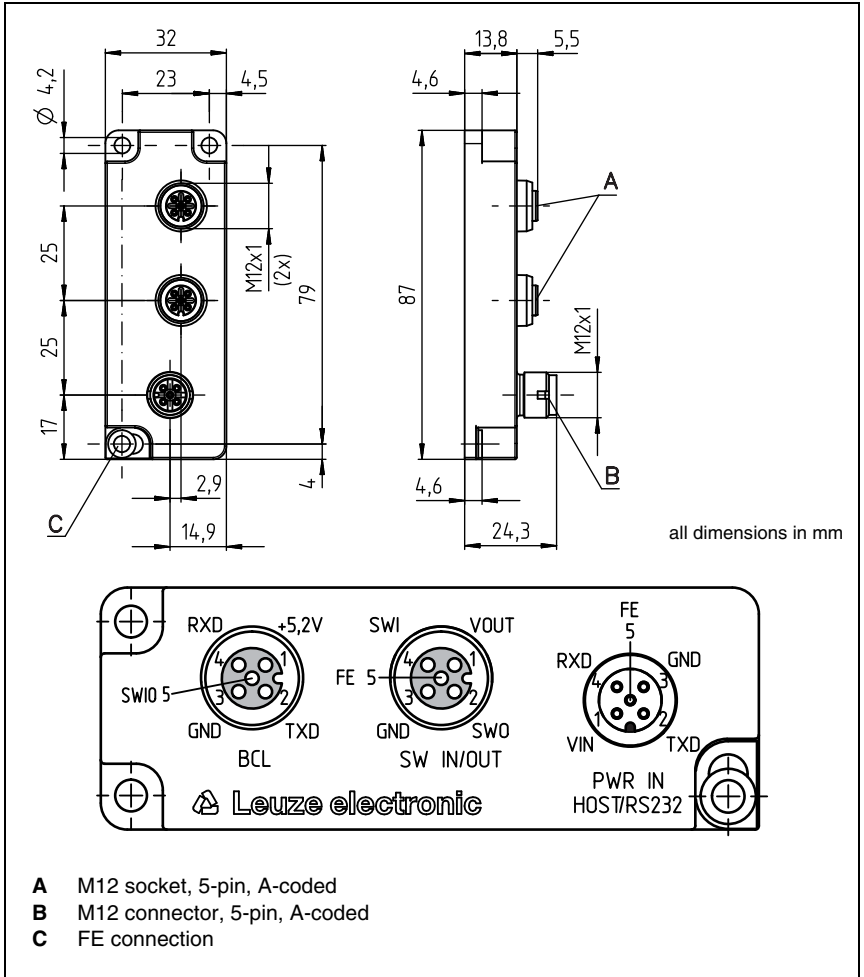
Dimensioned drawing and pin assignment of the MA 8.1 connection unit
